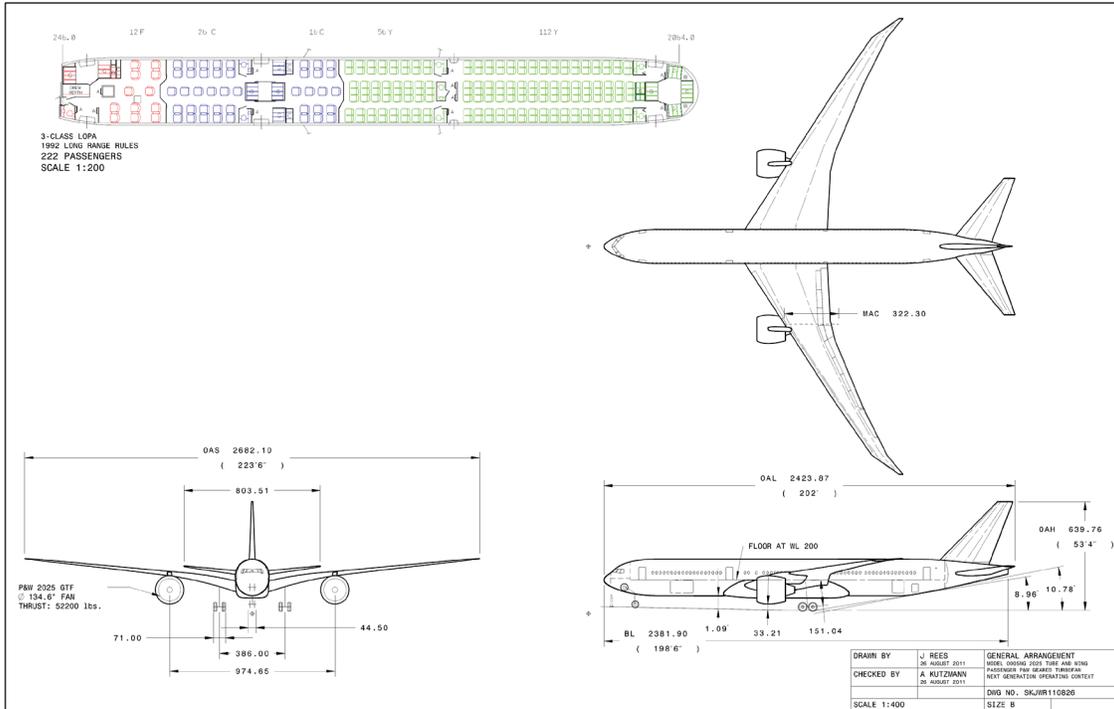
General Arrangement Drawing – 2025 T&W-0005 NG Passenger
